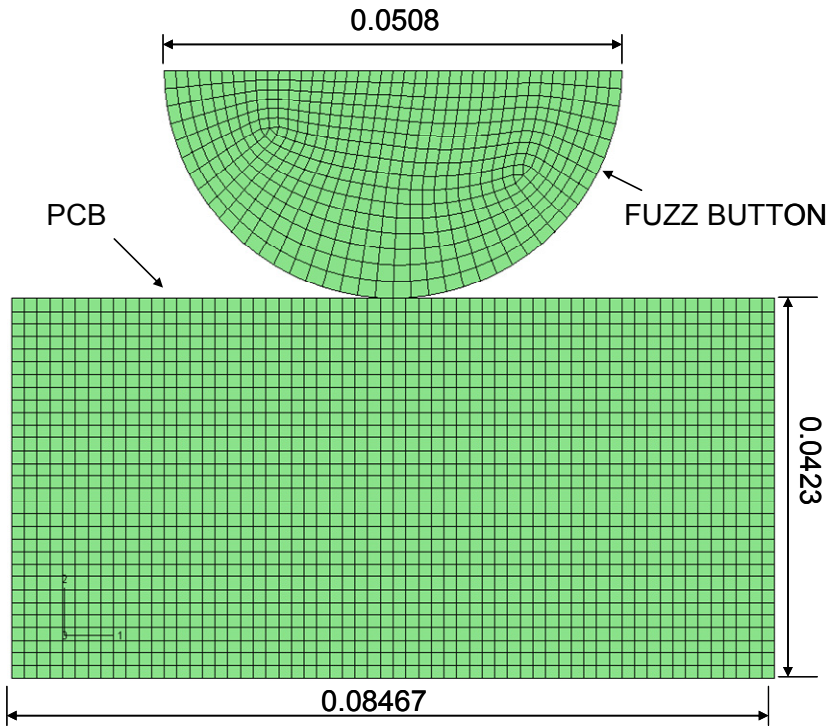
2D Model with a finer mesh representing the fuzz button and PCB
